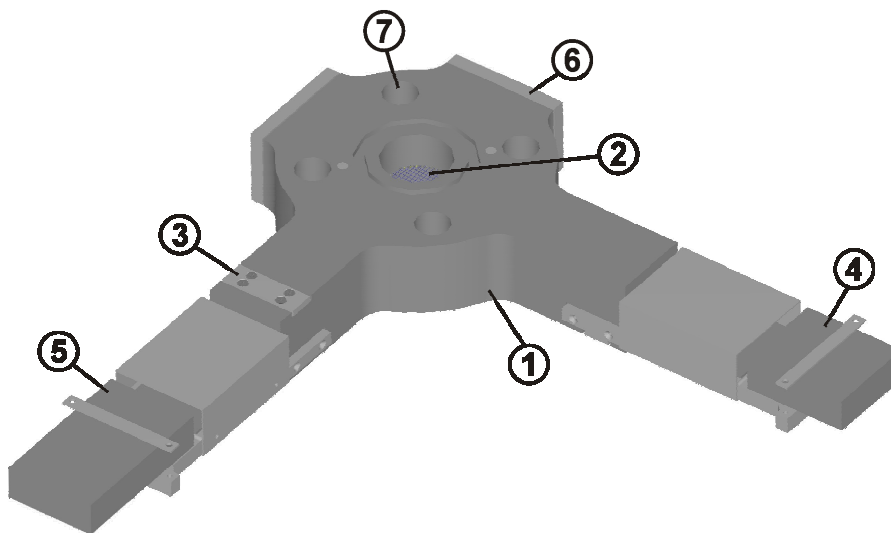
CAD view of the complete sensor for DN50 pipe, 16x16 electrodes:
